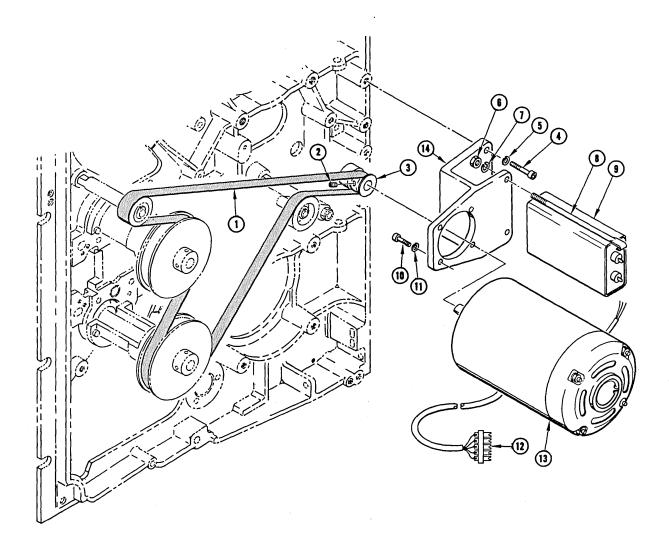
Capstan Drive Motor, Pulley and Belt
